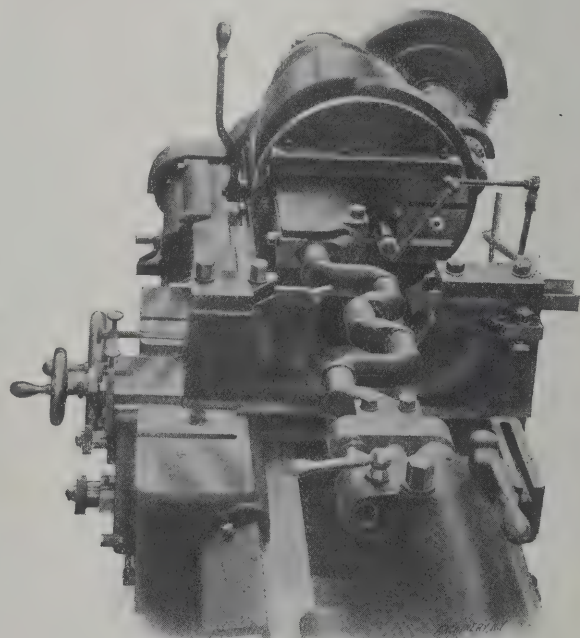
The Arrangement of the Tools for Cutting the Fillets and Turning the Crank-pins
